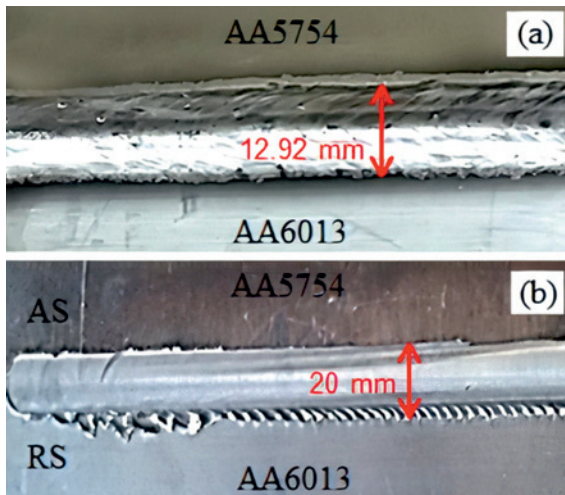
Macro images of the welded samples: (a) GMAW and (b) FSW.
